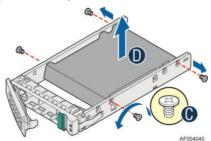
Installing Hard Disk Drive – Removing plastic drive blank
